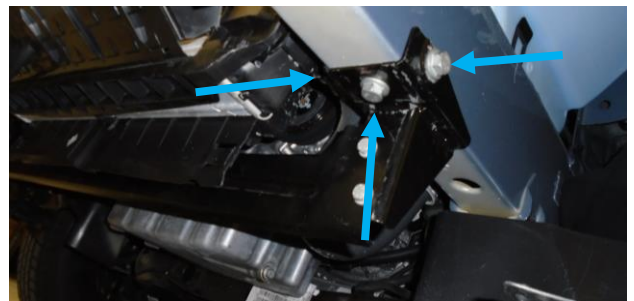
Engine Crossmember Bracket Factory Bolts (Driver Side Shown)
